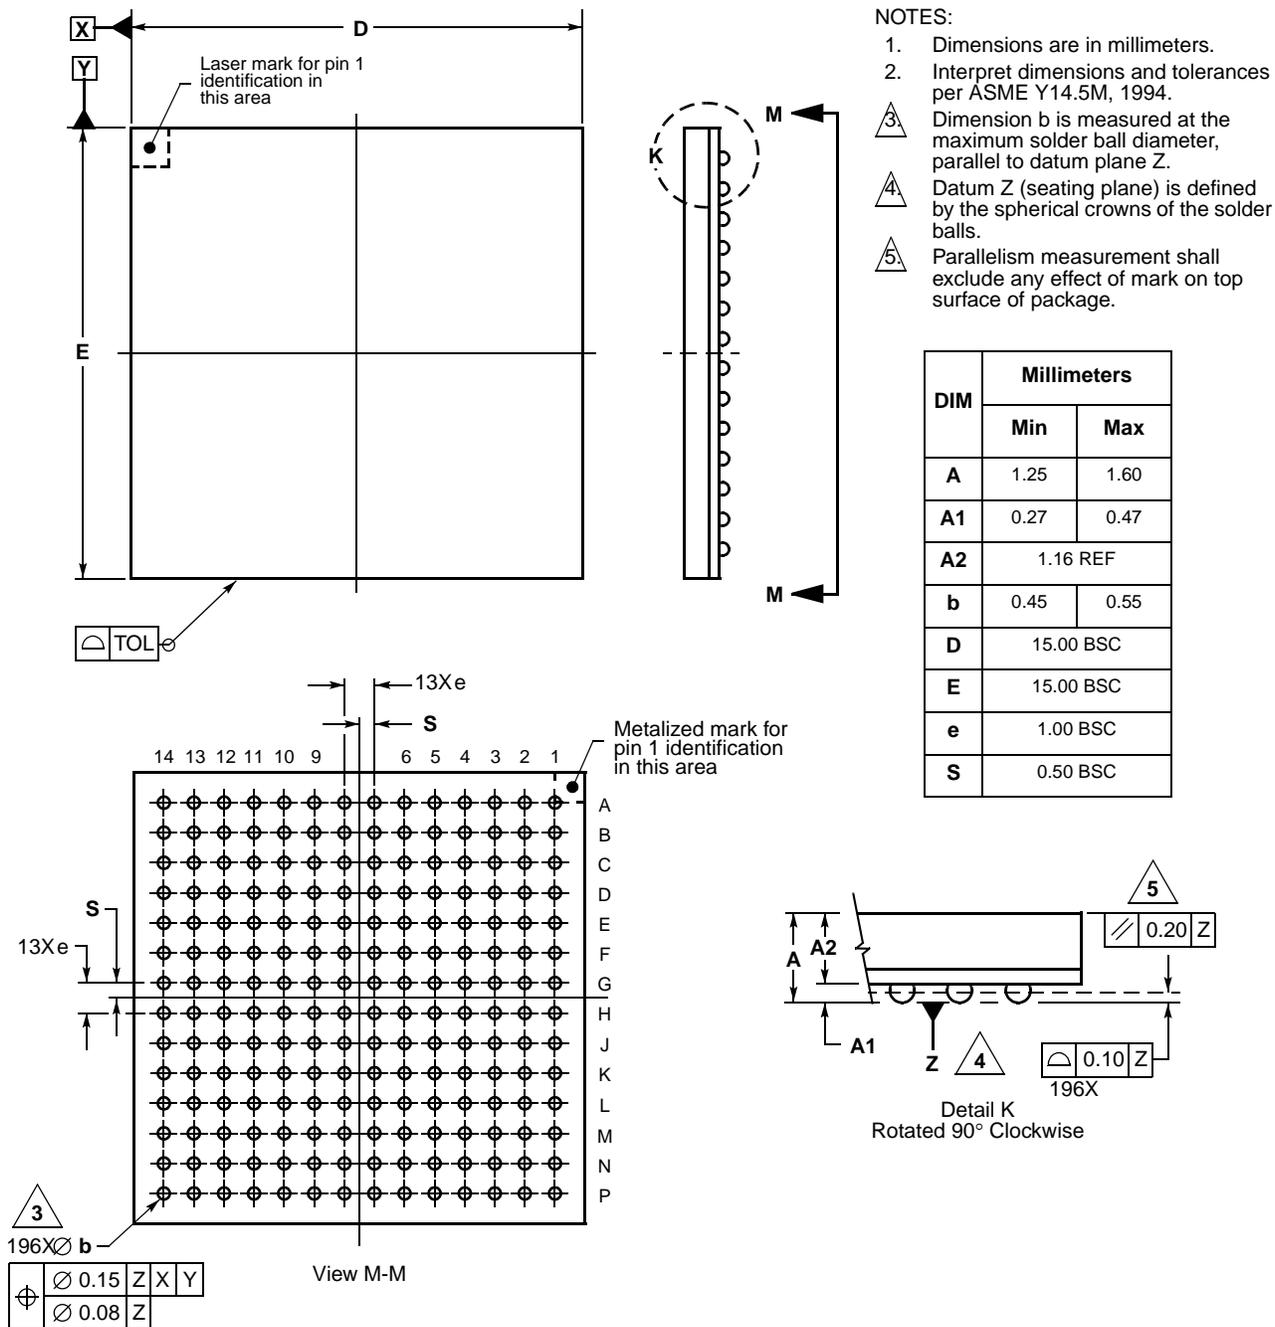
196 MAPBGA Package Dimensions (Case No. 1128A-01)
